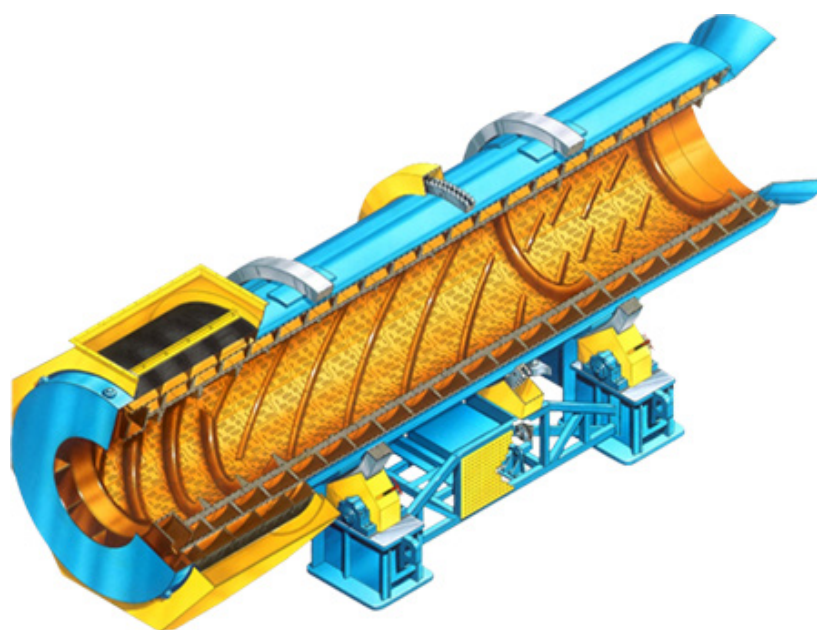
DIDION RS Heavy duty rotary separator / thimble cleaners.
